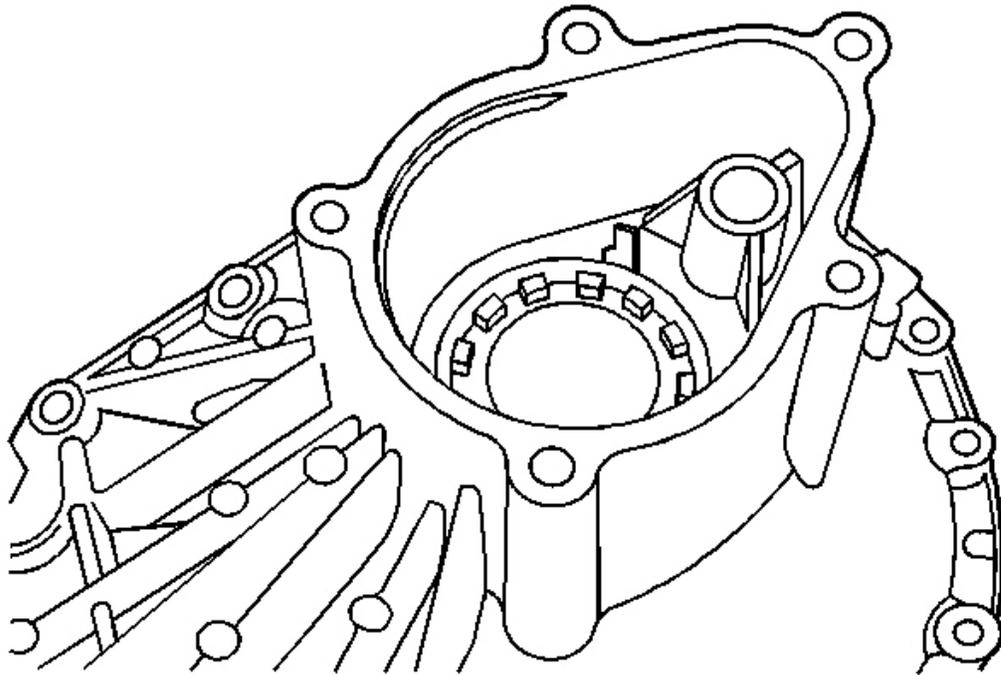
Bending Right Side Differential Adjuster Nut Lock Tab Over Differential Adjuster Nut Sleeve
